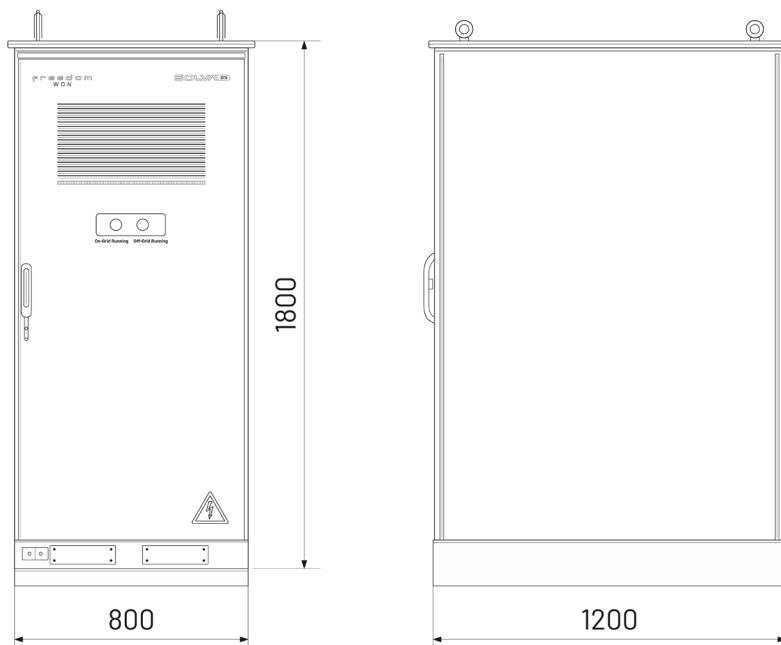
Dimensions of the SOLVA STS 2IN cabinet
